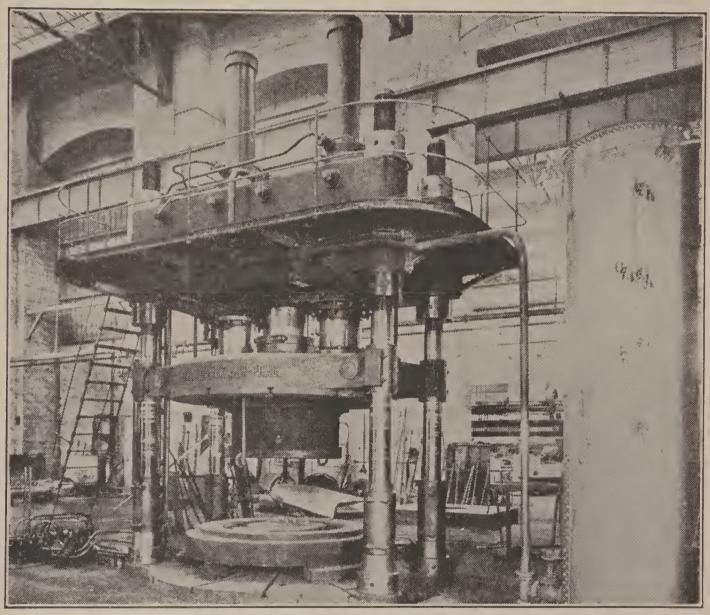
Hydraulic flanging press, 600 tons pressure. Built by Breitfeld, Daněk & Co.
